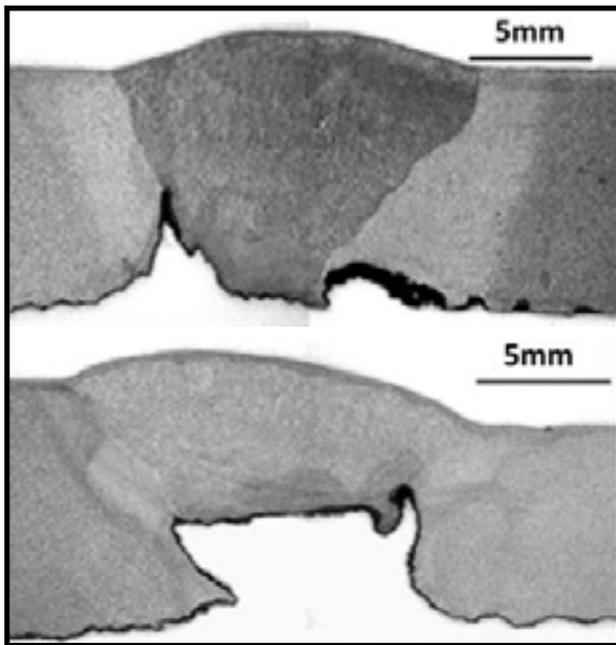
Corrosion of gas pipeline welds due to welding imperfections.
